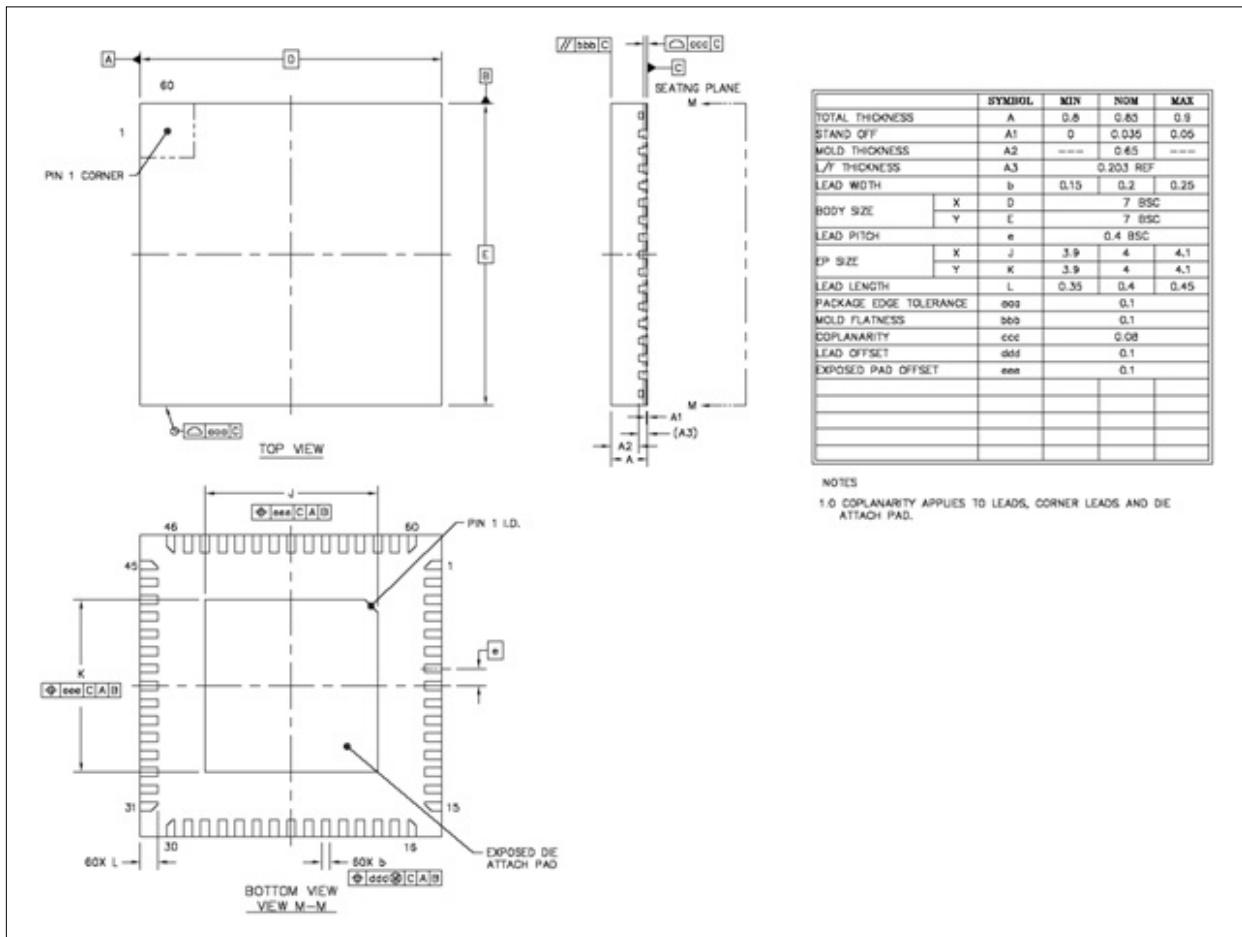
CX20811-11Z Package Dimensions—60-QFN
